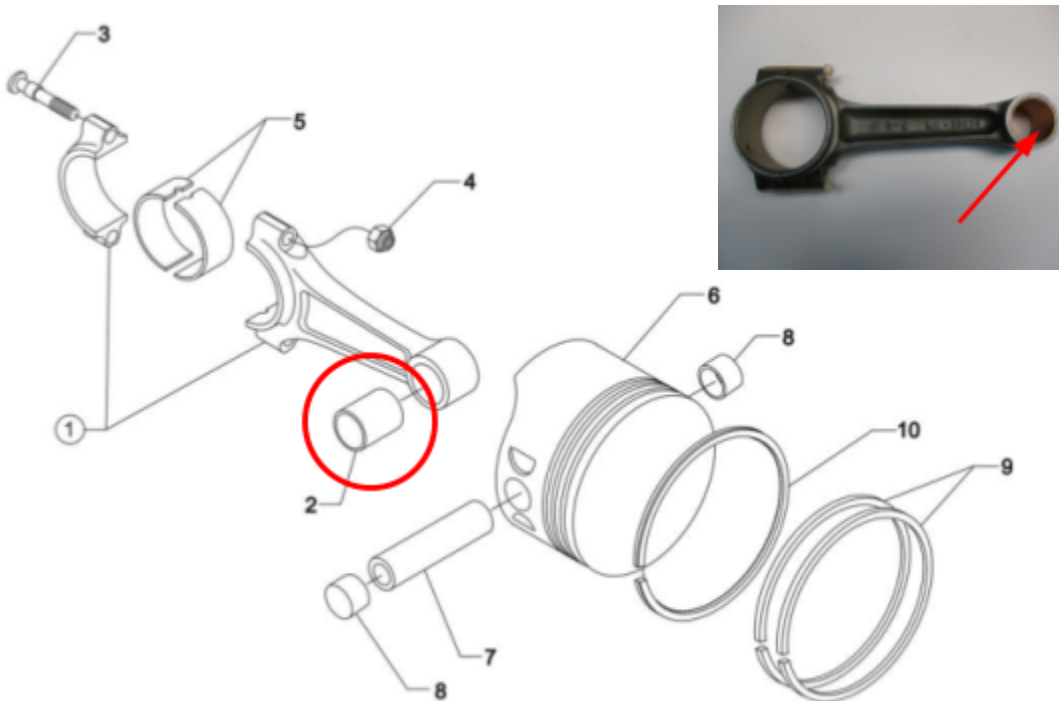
Lycoming O-235-N2C series 4 cycle engine connecting rod assembly exploded drawing. The bronze bushing is labeled with the number 2 (Lycoming, 2012, pp. 1-83).
